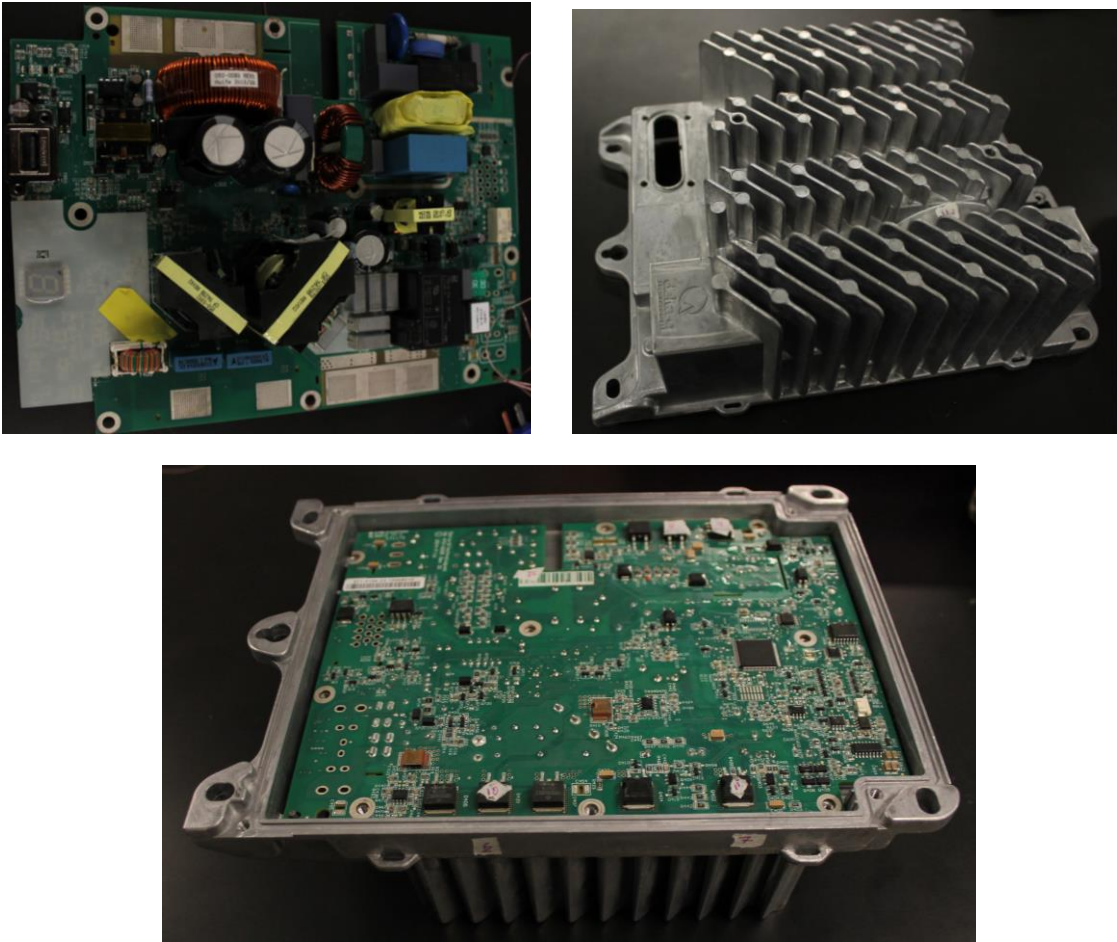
Delta-Q's IC650 battery charger; Top left: bottom of PCB; Top Right: heat sink enclosure top view; and Bottom middle: PCB in heat sink upside down.
